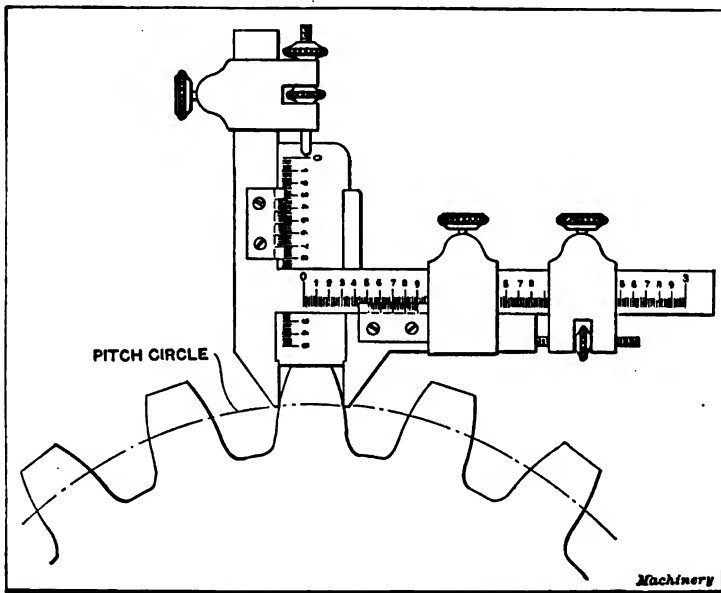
Vernier Caliper for measuring the Thickness of Gear Tooth at the Pitch Circle
